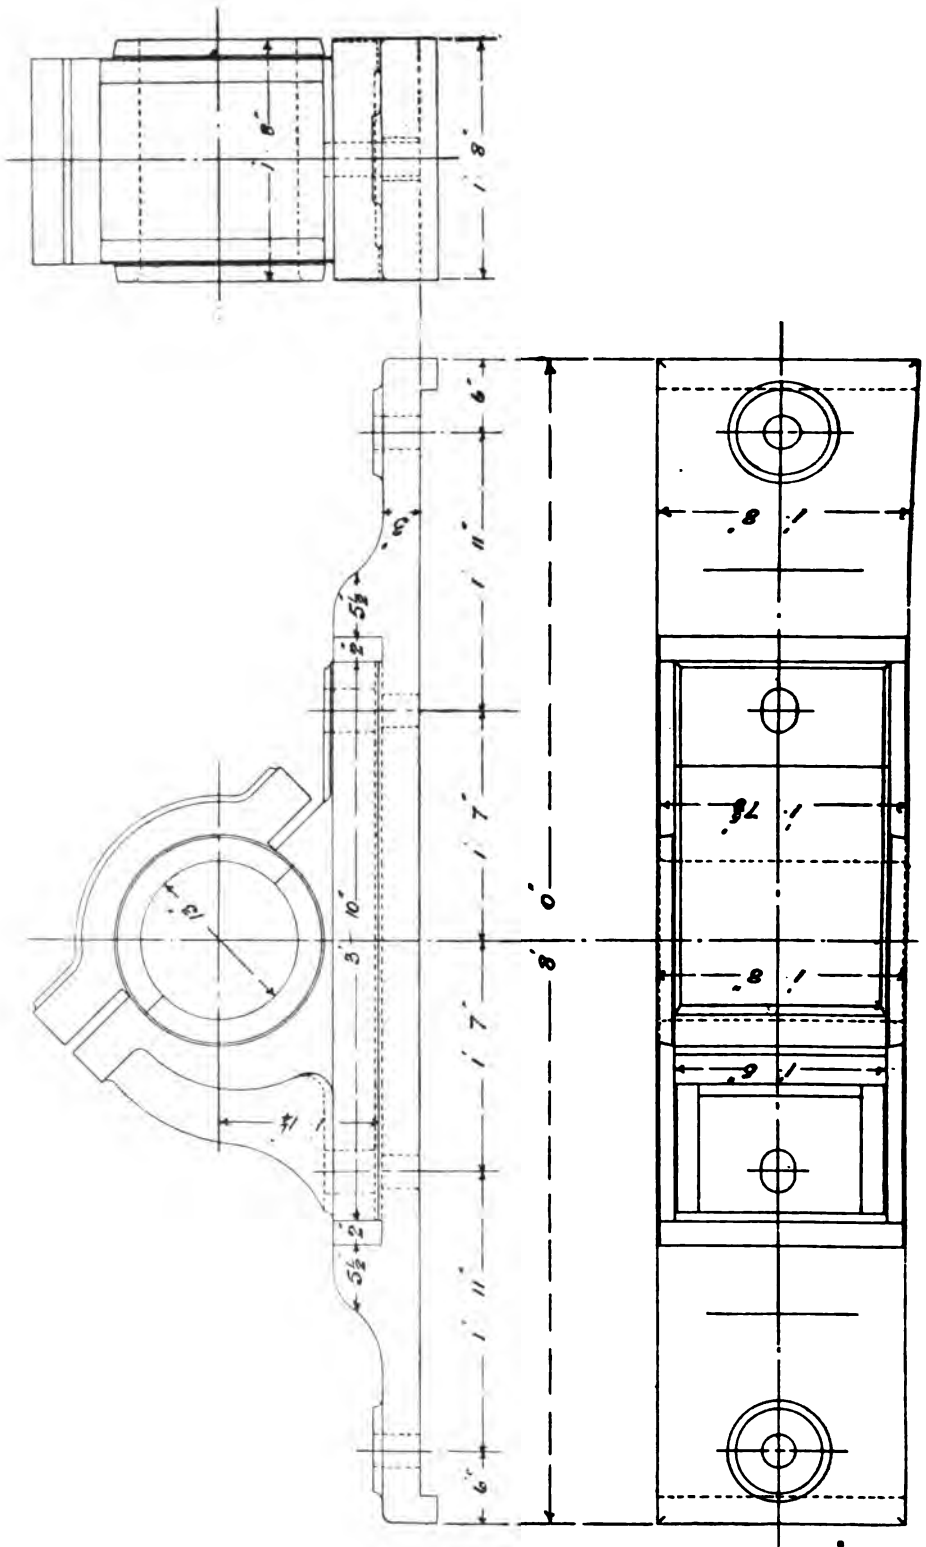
PLAN AND ELEVATION OF AN ANGLE PIEDestal.
